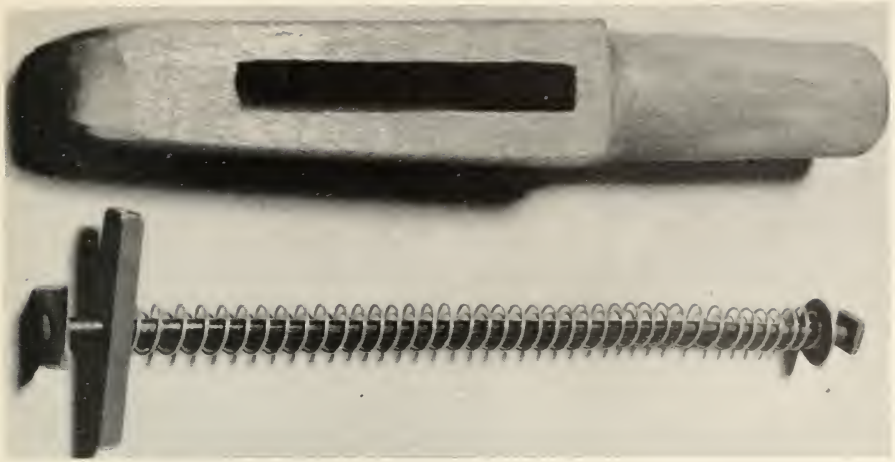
Wooden shaper tool fitted with coil spring and crossbar.
